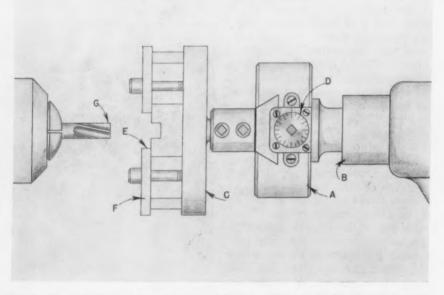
Boring head setup for performing light duty milling or jig boring operations on a lathe. Setup permits use of different types of faceplates for work-clamping purposes.
